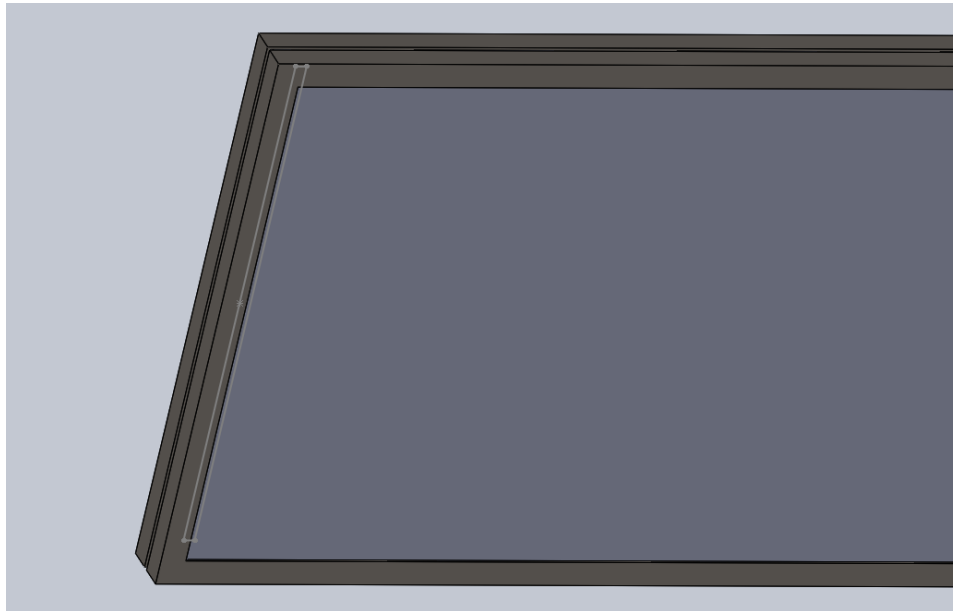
Assembly With Outer Shell and Steel Frame Installed
